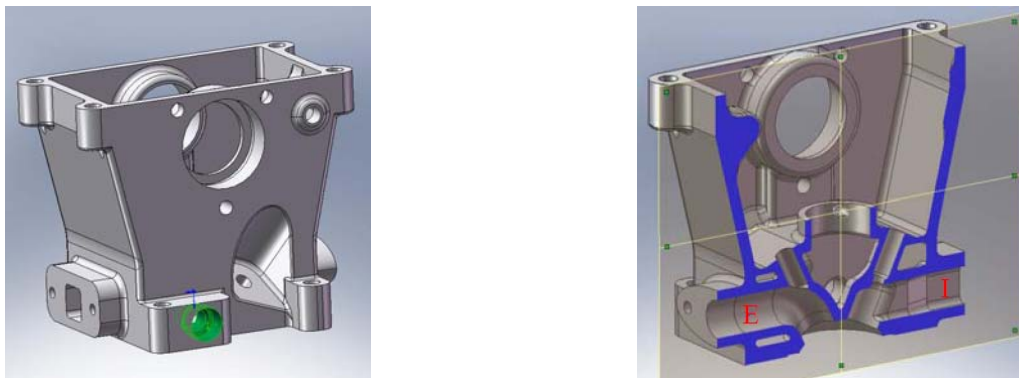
Cilinder Head CAD model (left) and its section showing the inside intricacy (right).
